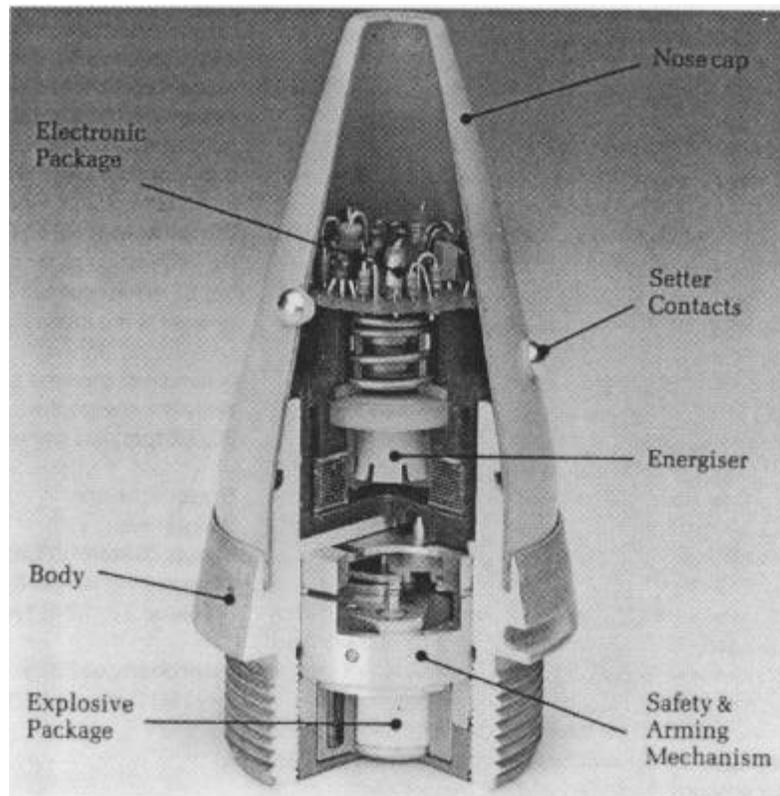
Example of a Modern Fuze with Electronic Initiator Package.
